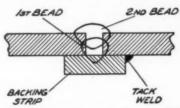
Cross-sectional sketch of typical joint in the tank structure showing relative position of backing strip and weld penetration.
